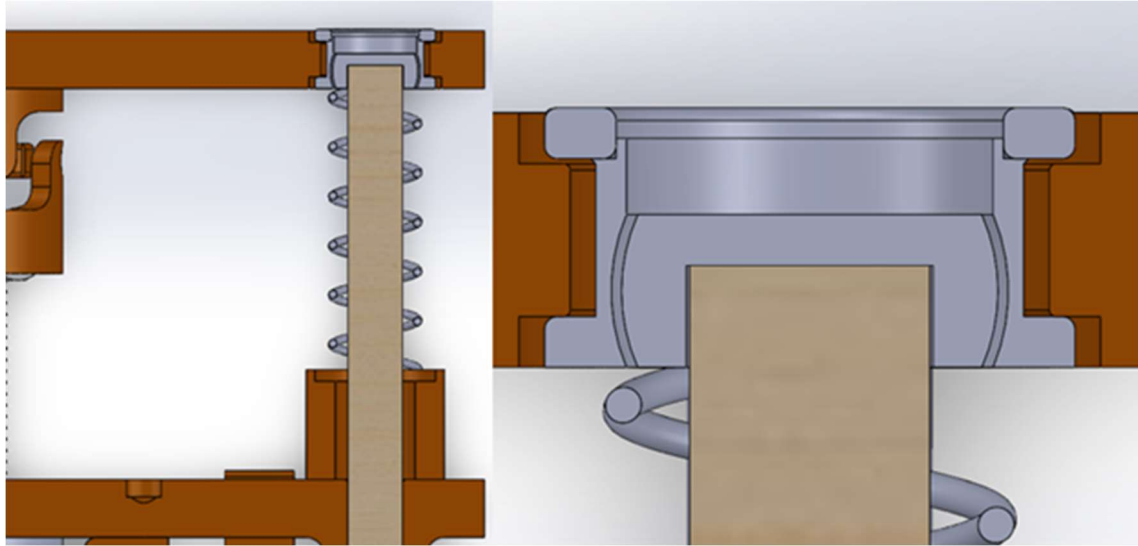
Figure R: Cross-sectional view of swivel joint, top plate and guide rods
